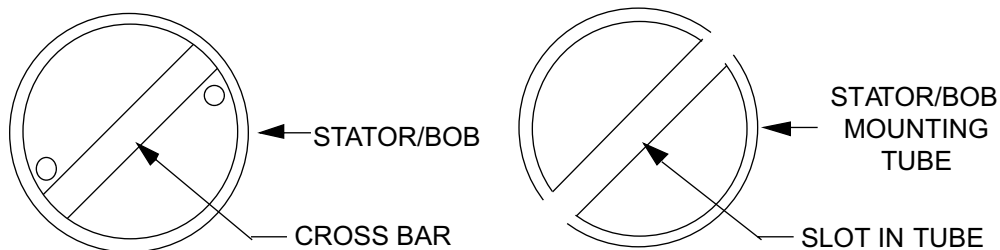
Stator/Bob Mounting Tube Alignment (End View)
